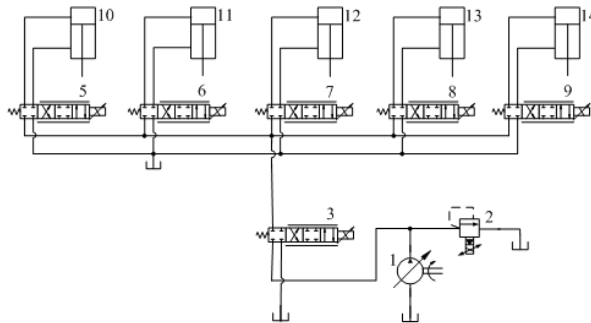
The schematic diagram of working connection of five-cylinder forging machine
